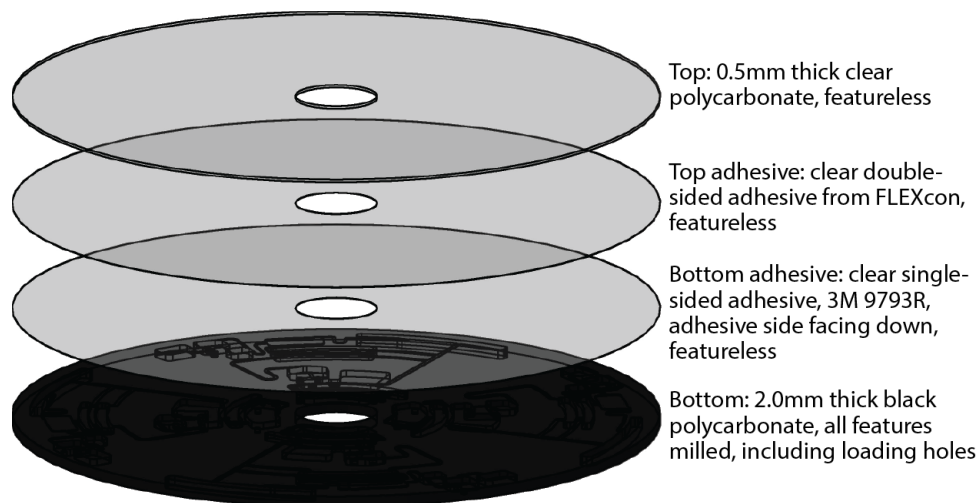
The improved fabrication technique uses black polycarbonate sheet, modified to have a thickness of 2 mm, for a bottom layer that includes all features and loading holes. The remaining layers are featureless and are in the original order.
